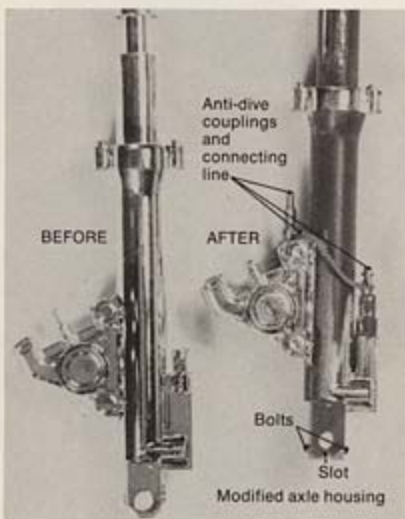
The Suzuki front fork before and after Paul refined the details on the axle housing and anti-dive mechanism.
